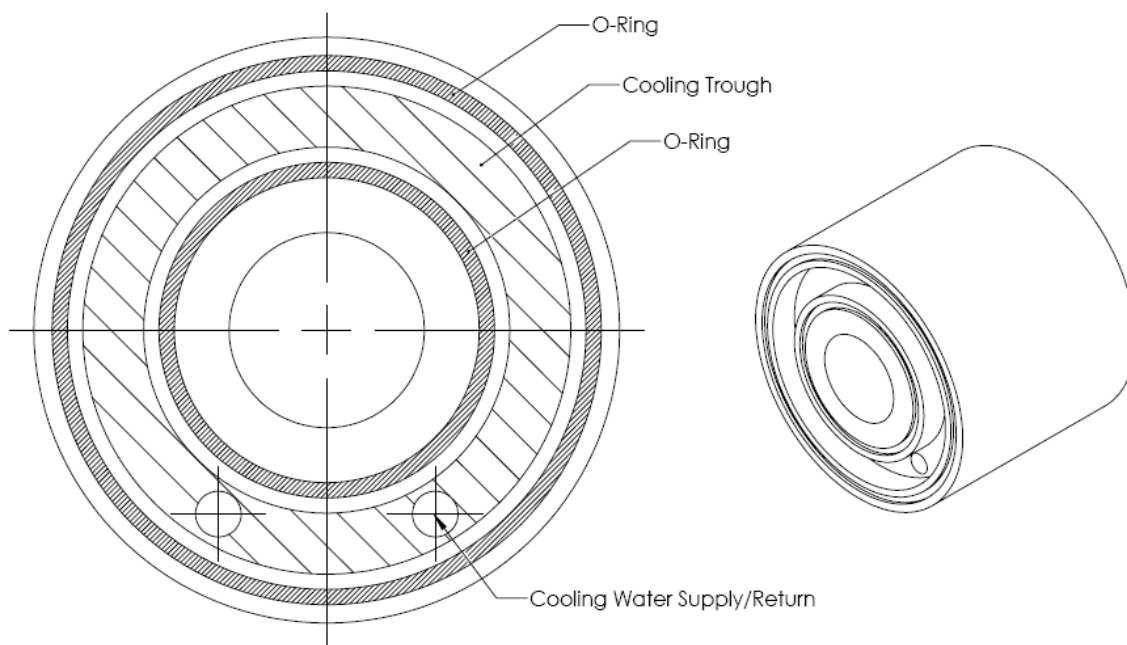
Schematic of cold-face pressure seal housing trough (left) and isometric view (right).
